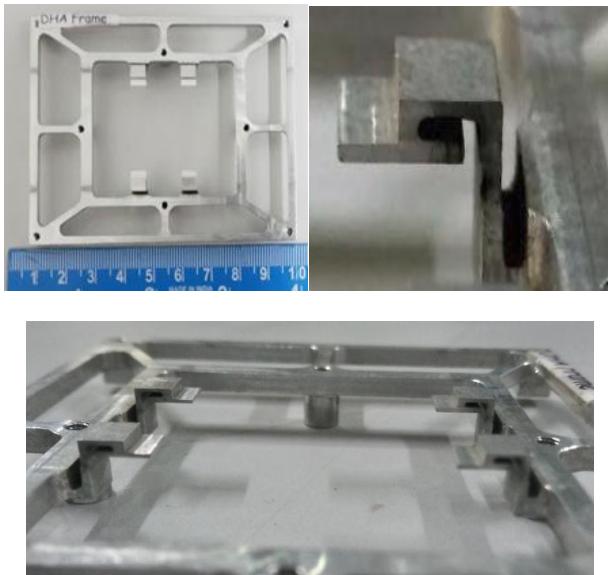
Detector holding frame fabricated from AL6061-T6 material depicting flexure design.
